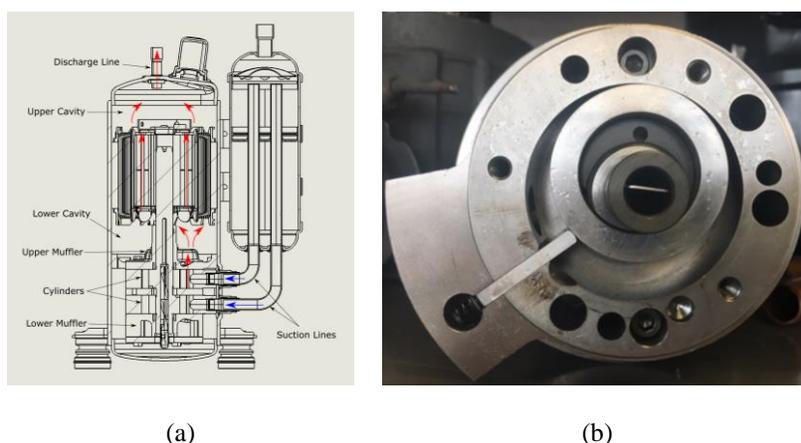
(a) typical structure of a rolling piston compressor; (b) compression chamber of a rolling piston compressor
